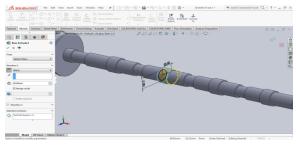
Draw the sketch as follows and make extrude in feature to form cam shape and Draw the remaining cams as above
